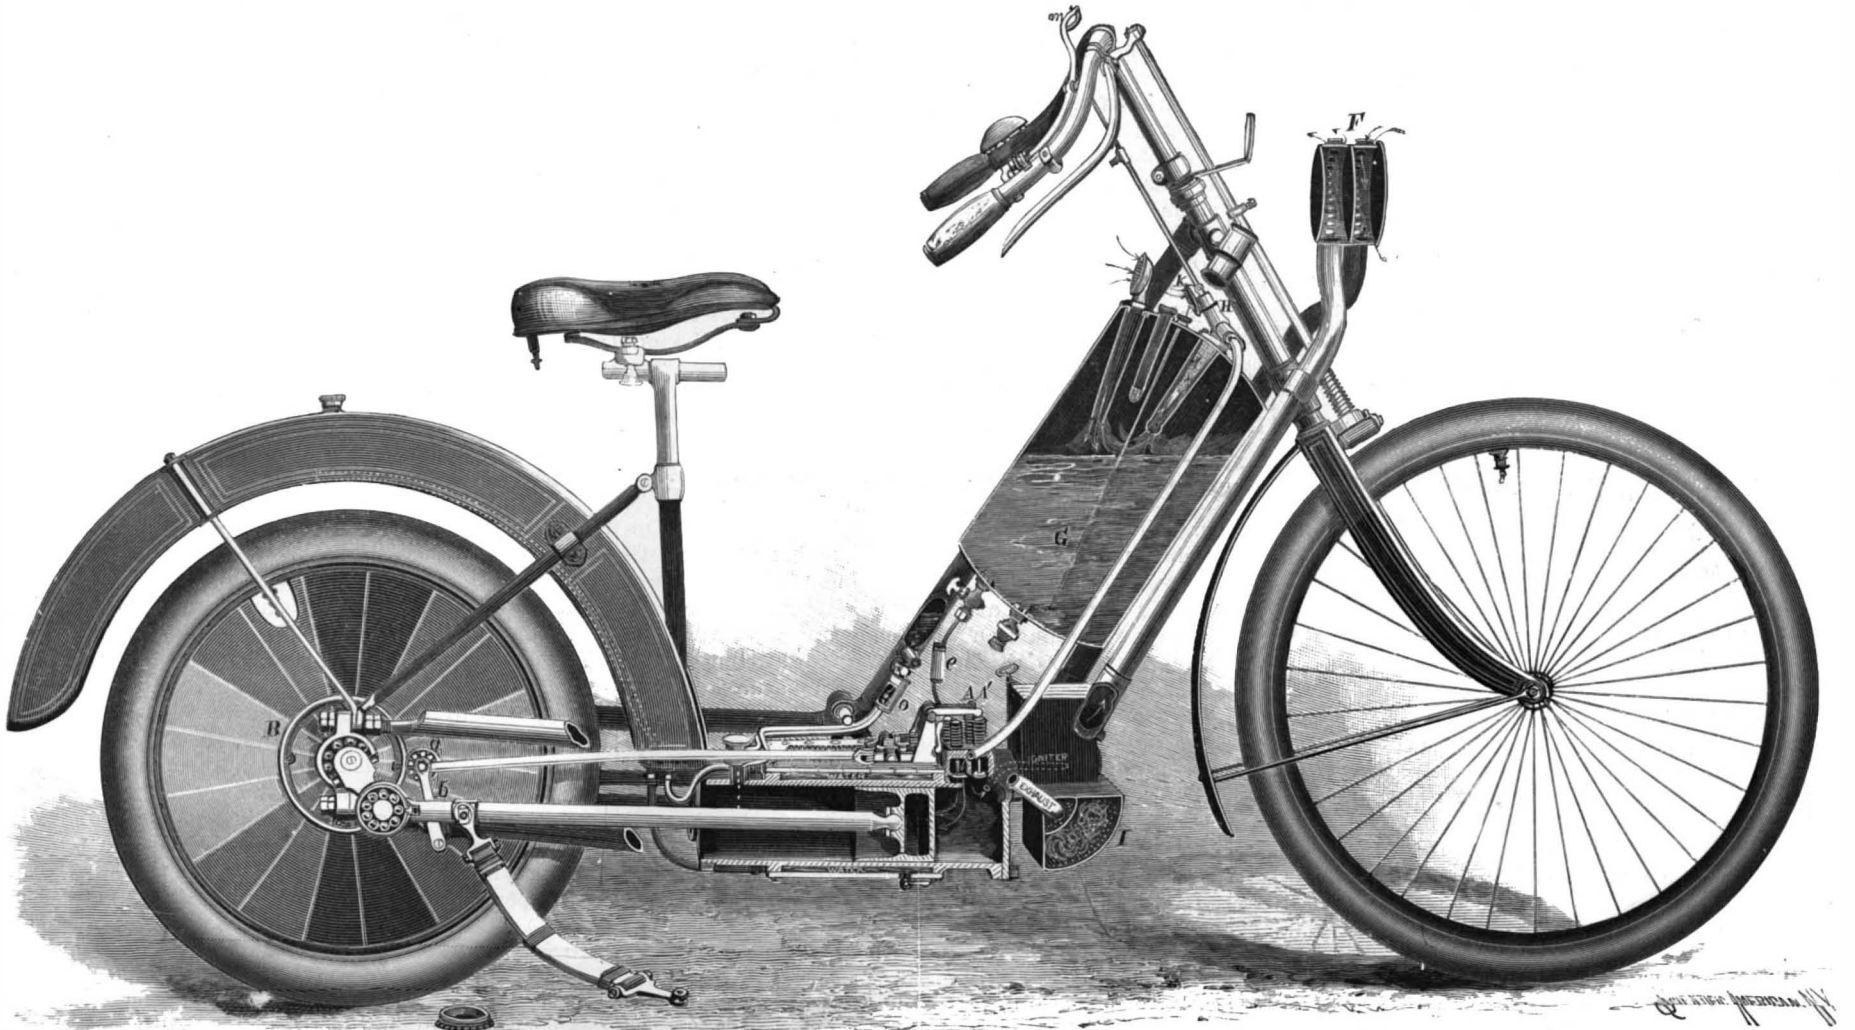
SIDE VIEW OF MOTOR CYCLE, PARTLY IN SECTION.
